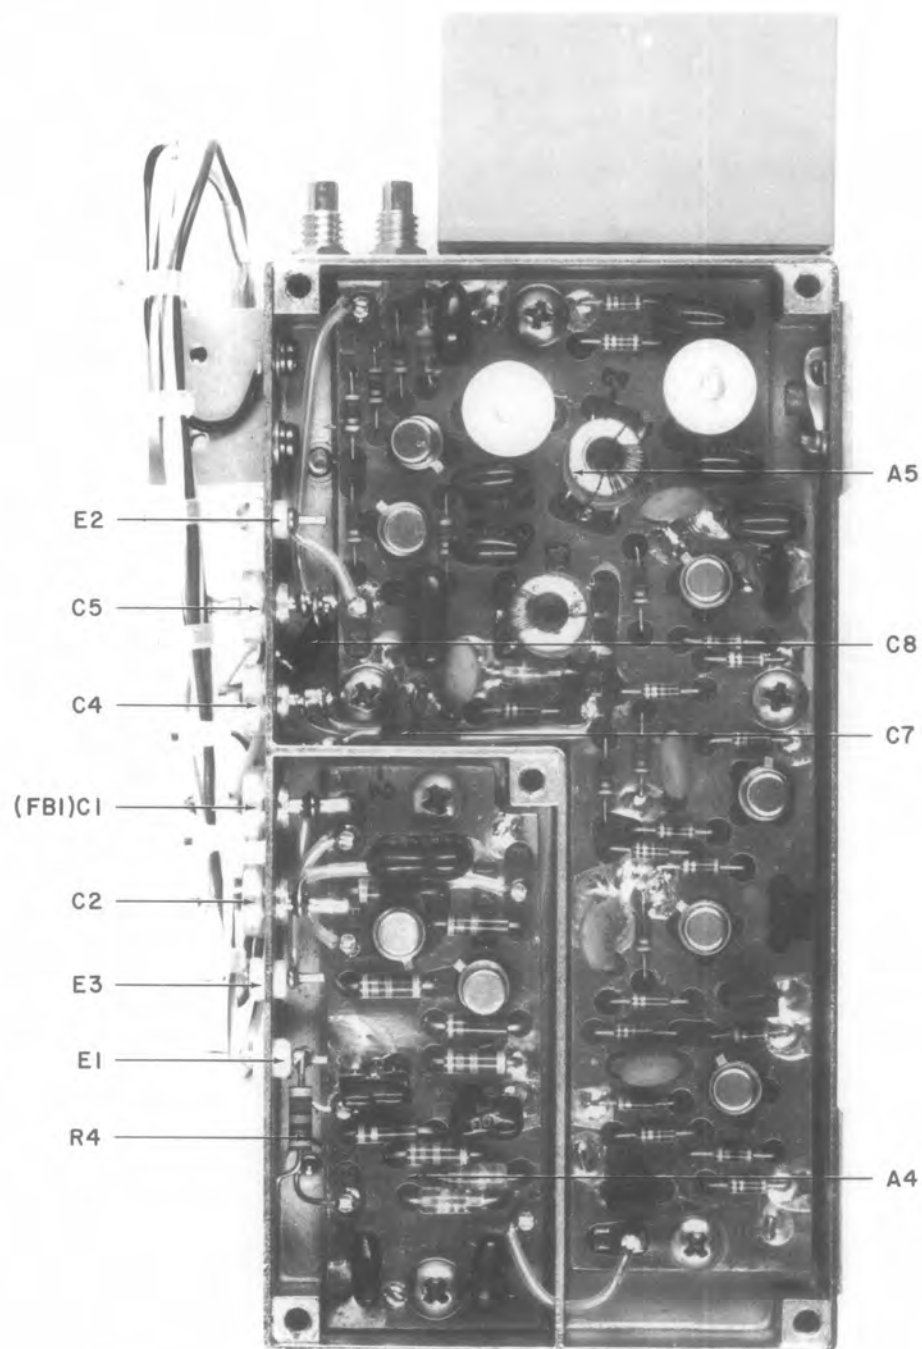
Type 72427-(X) IF Demodulator Assembly (A2), Left Side View, Location of Components
